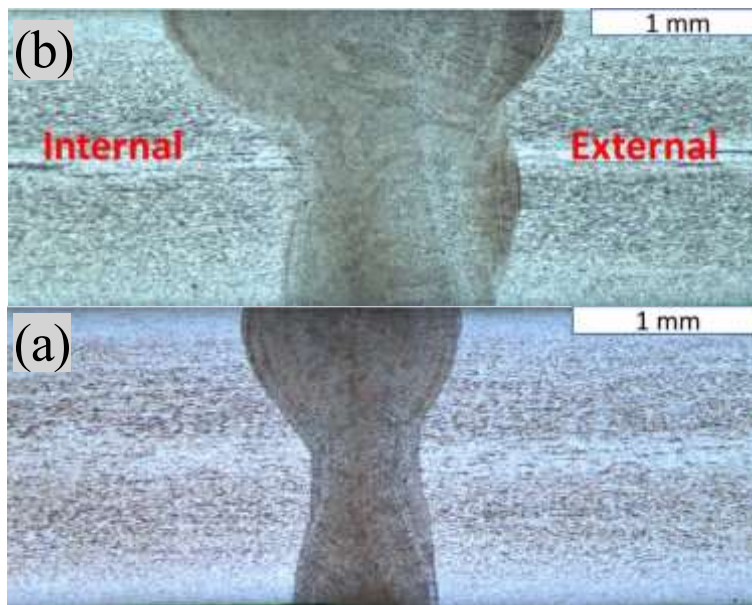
Macrograph of the weld cross section: (a) Standard (linear), (b) Interlocking.
